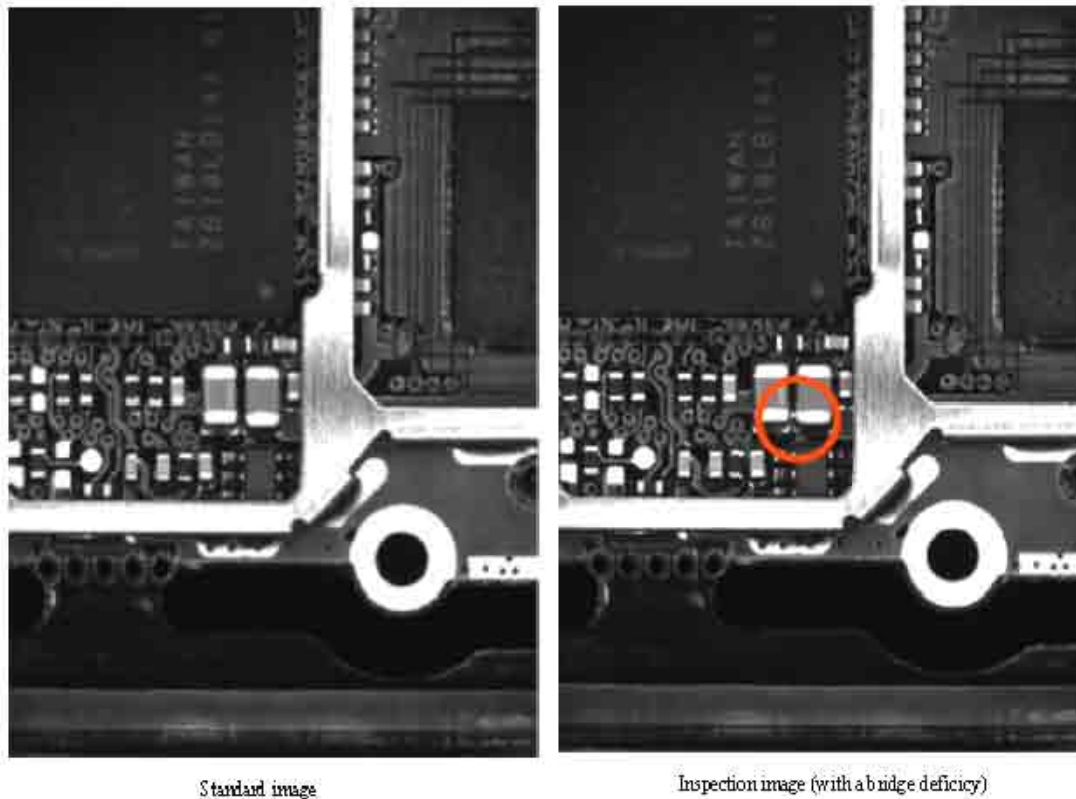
The bridge deficiency (solder overflow) in a PCBA
